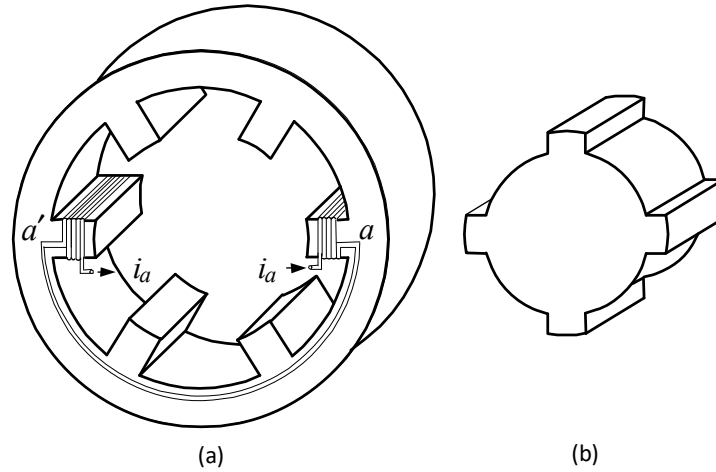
Perspective view of an SR machine. (a) The stator with the winding of phase  $a$  shown. (b) The rotor.
